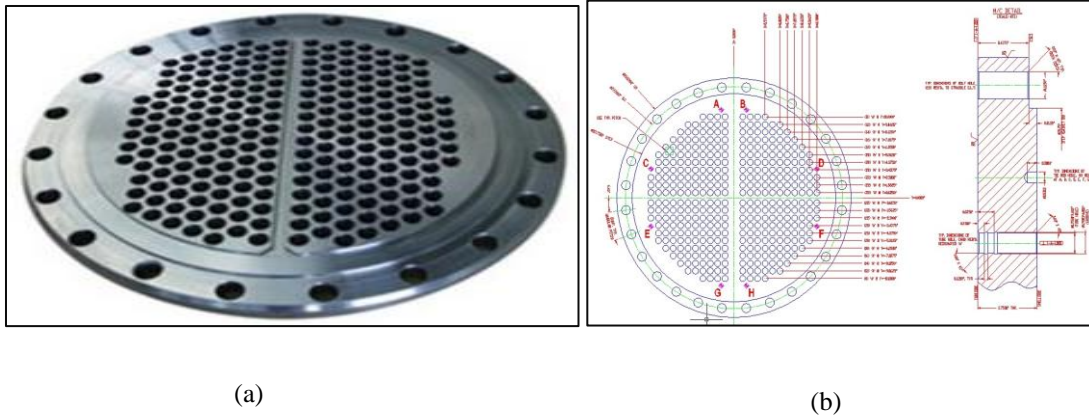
Machine Shop Part Sample. (a) Final Product (b) Blue Print
